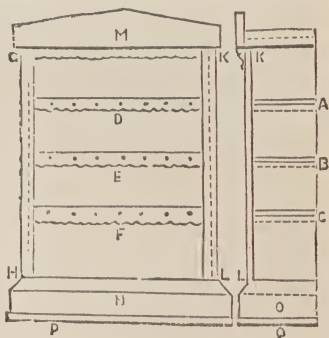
ELEVATION. FIG. 461. SECTION.
